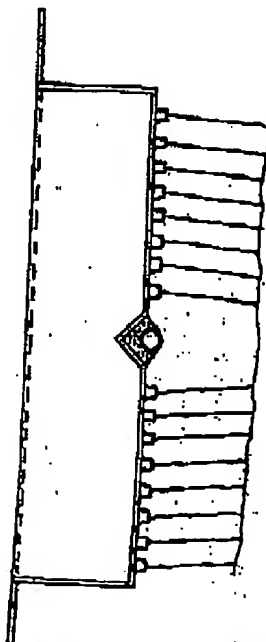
External support for large bushing consisting of a water-cooled pipe located centrally and longitudinally under the nozzle plate with refractory casing located between pipe and nozzle plate.
